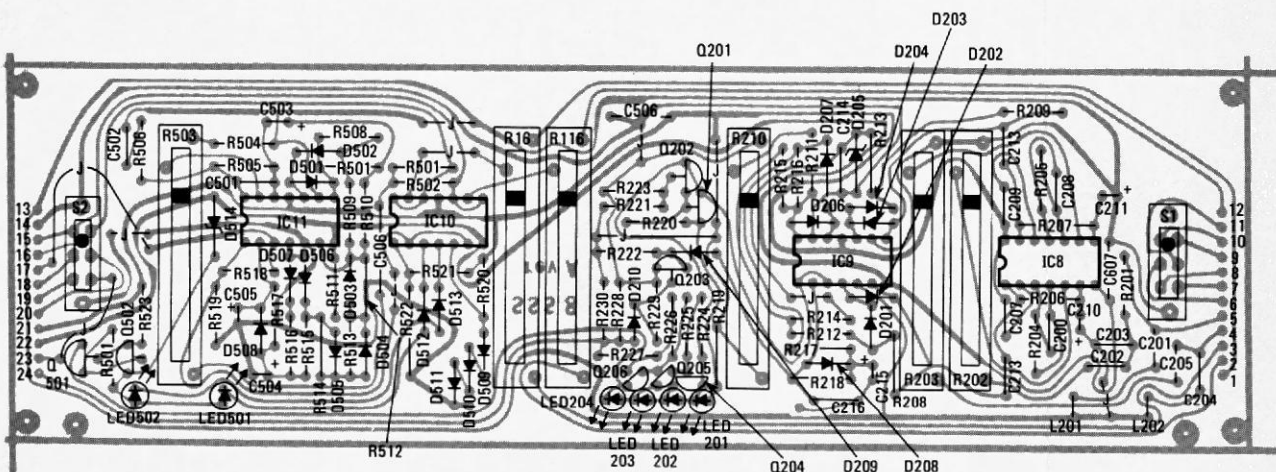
PARTS PLACEMENT guide for the front PC board. The use of IC sockets is recommended.
